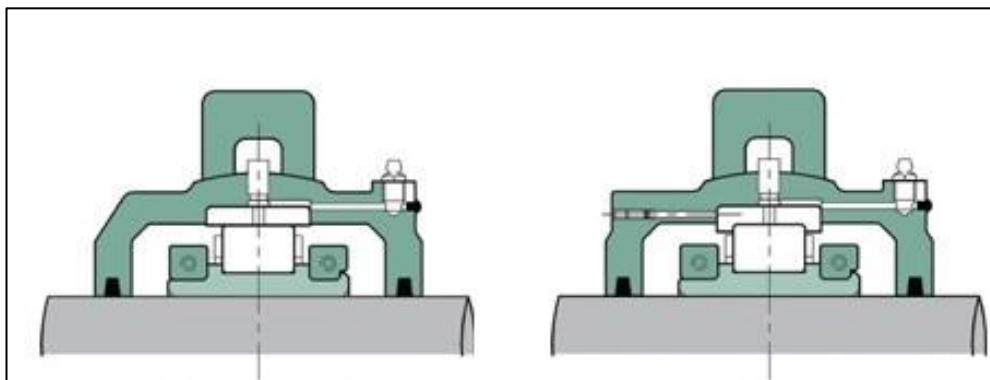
EX Type and GR Type bearing outer race (Cooper Bearing, 2015)
